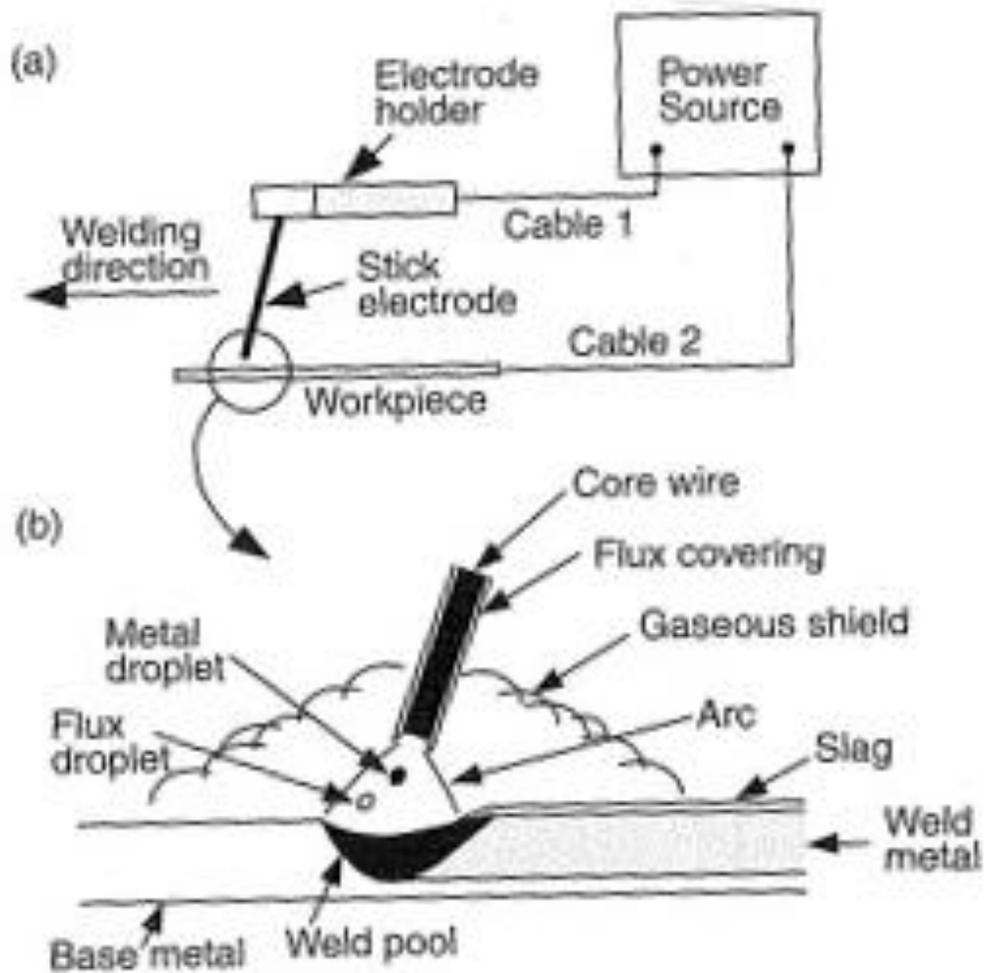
SMAW (a) overall process (b) welding area enlarged [21]
